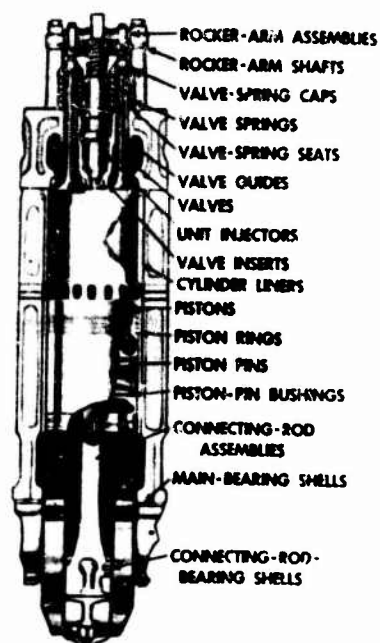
Cutaway View of 53, 71, and 149 Series Engine Cylinder
